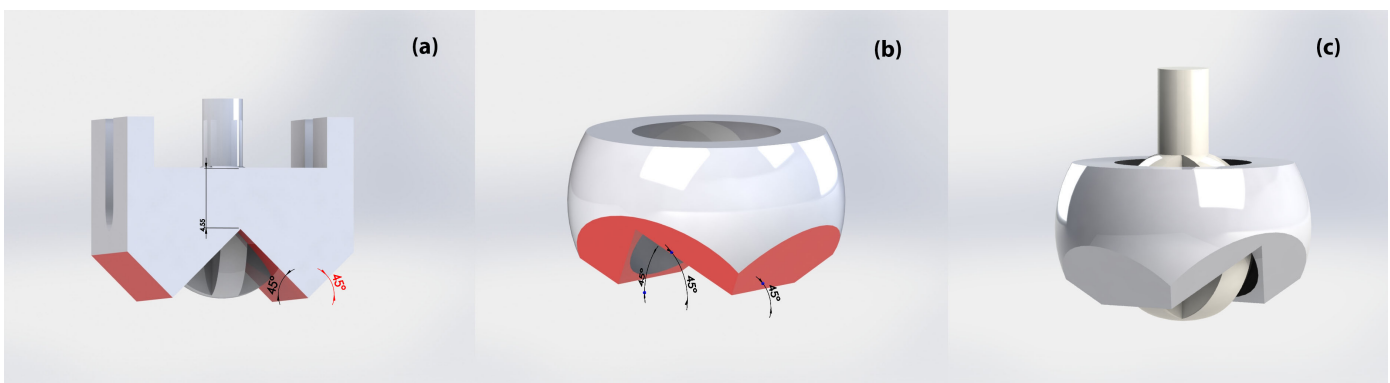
(a) Illustration of a socket with a non-spherical external shape, (b) Illustration of a spherical socket with its bottom hemisphere modified to be less supported, (c) Illustration of the proposed assembly.
